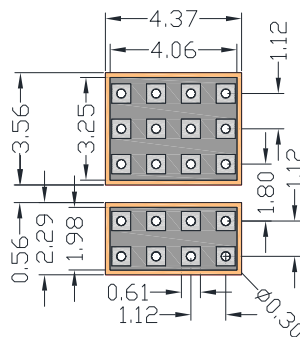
PD70224 Bottom layer Copper and Solder Paste Recommended PCB Layout for Thermal Pad Array (mm)
